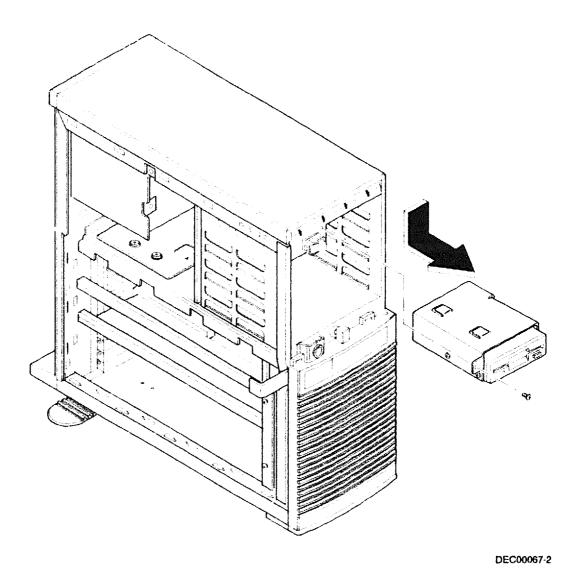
Removing the 3 1/2-Inch Diskette Drive (Top Slot)
